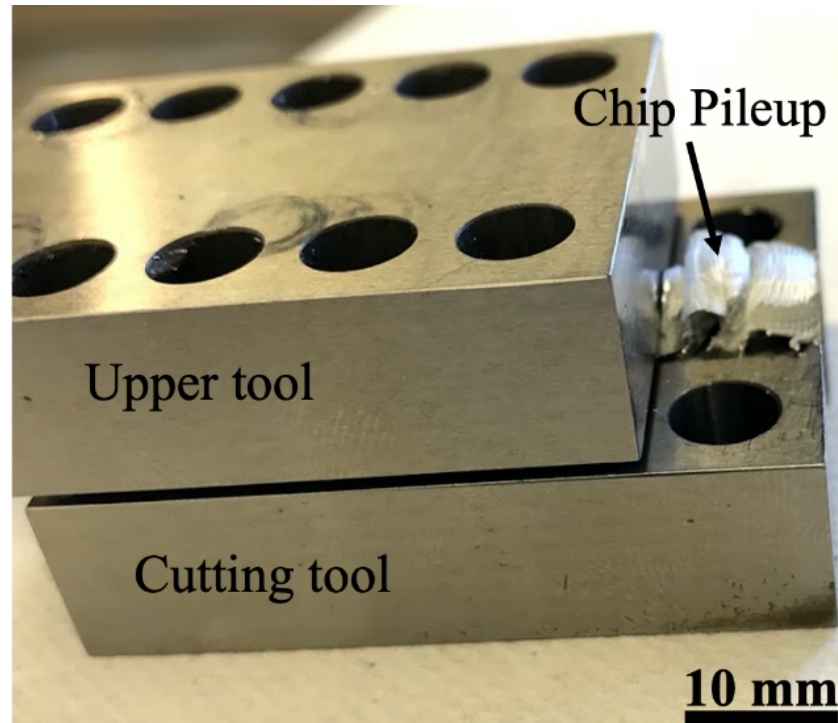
An image cutting tool assembly showing chip pileup under conditions of dominant stick-slip.
